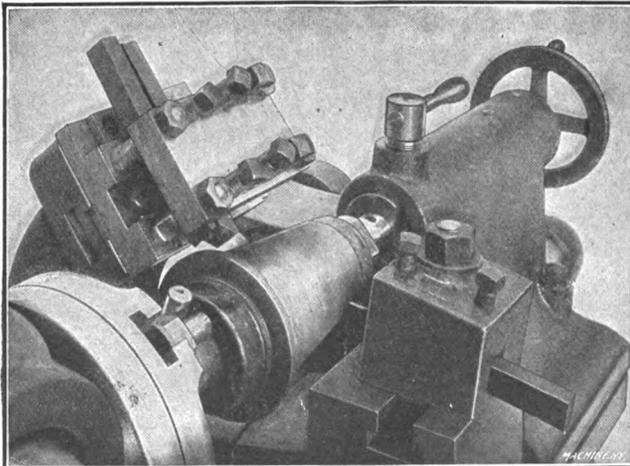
Tools shown in Detail in Figs. 6 and 7, set up on Fay Automatic Lathe
